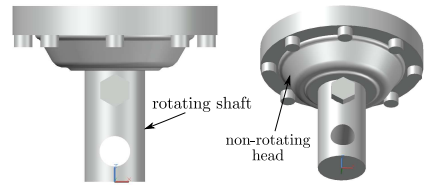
A typical rotation shaft and its non-rotating counterpart is shown in profile and 3D view.
